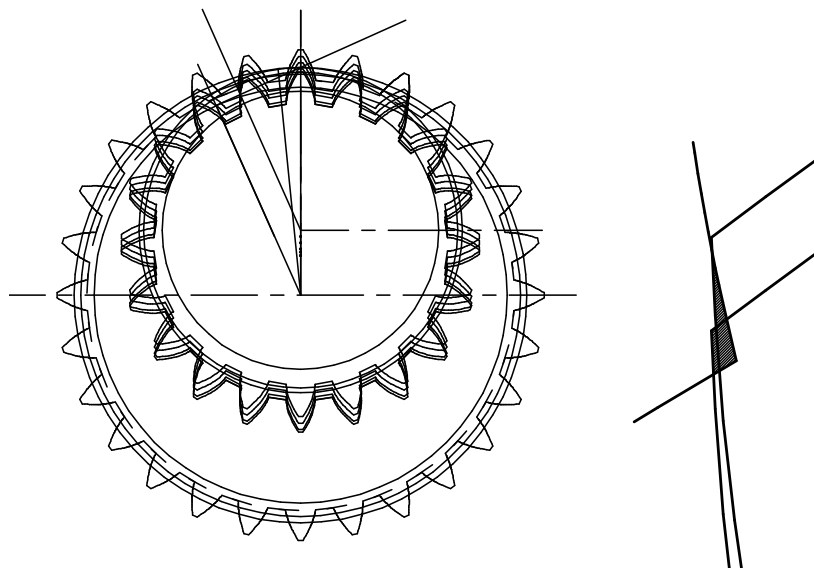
Generation of a 28 tooth internal gear with a 20 tooth cutter (the radial feed)
